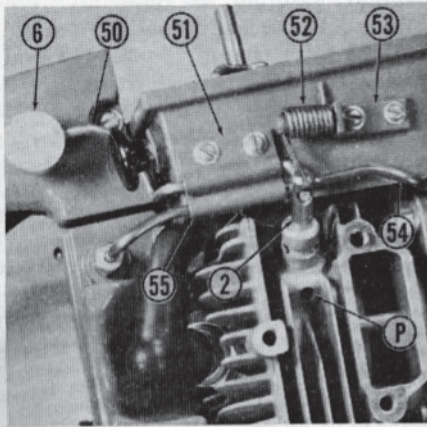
View with muffler assembly removed to show compression relief mechanism. Depressing throttle latch button (6) actuates lever (50) lifting compression relief plunger (2). Engine compression is then relieved through port (P).
